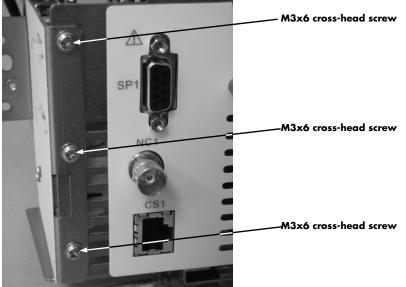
Remove three (3) M3x6 cross-head screws.
